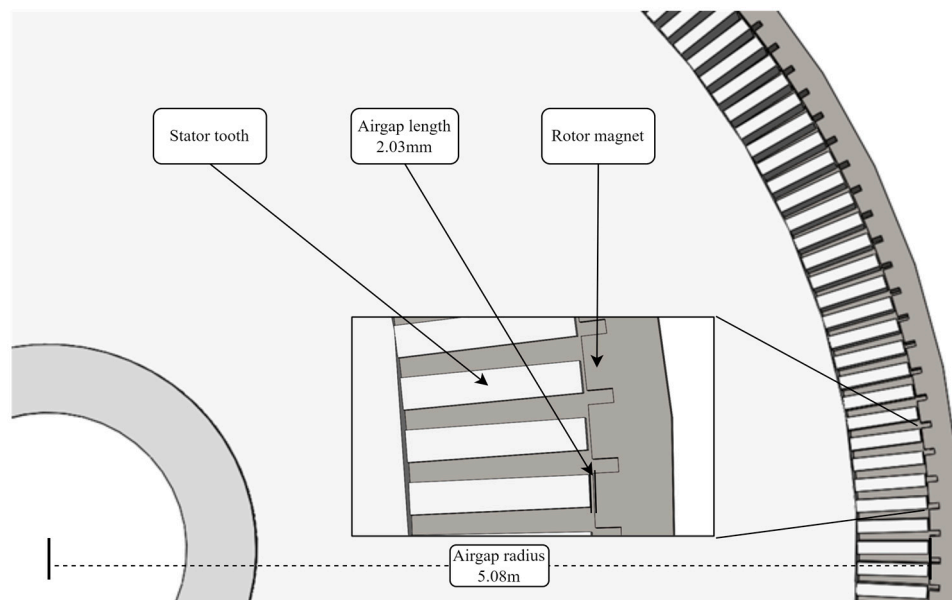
Electrical generator assembly highlighting dimensions and airgap.
